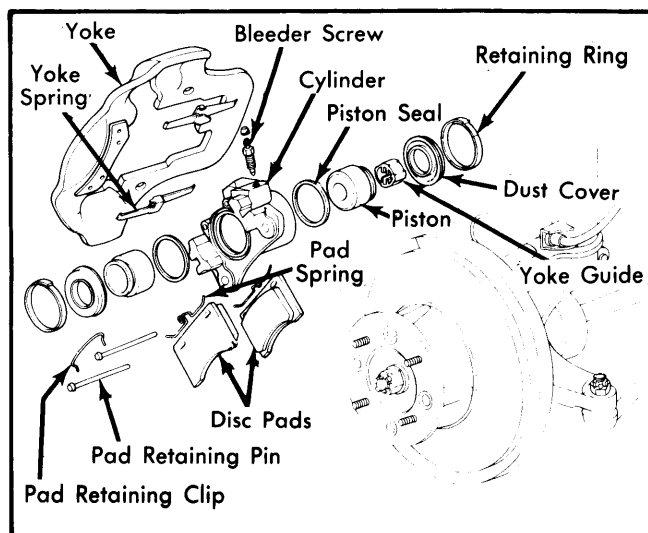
Disc Brake Assembly for Civic and CVCC Sedan
